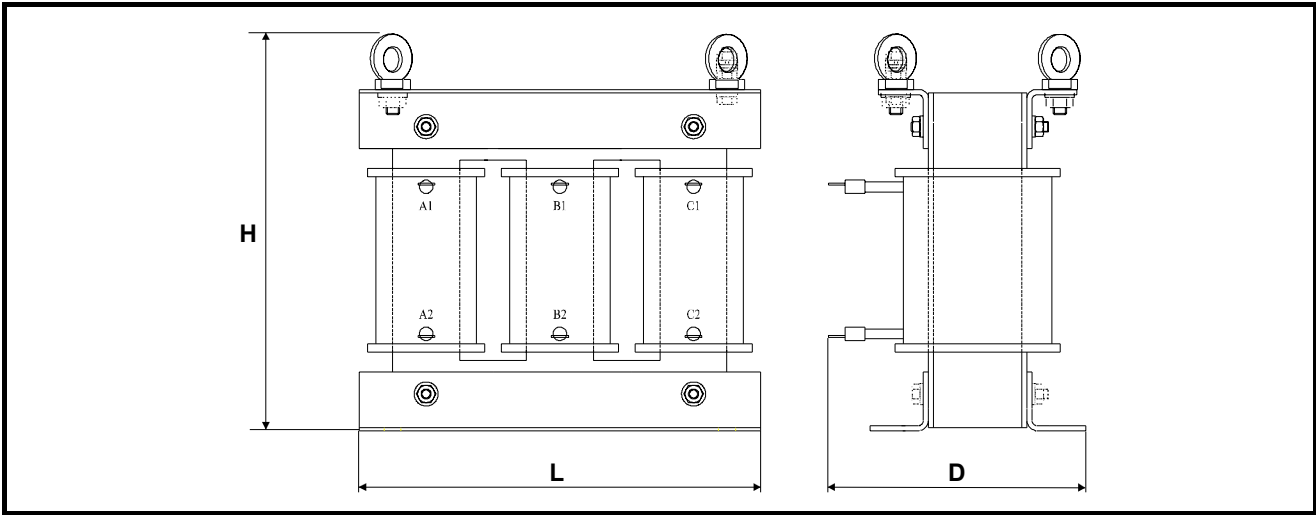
Switching frequency filter inductor type 3 dimensions
